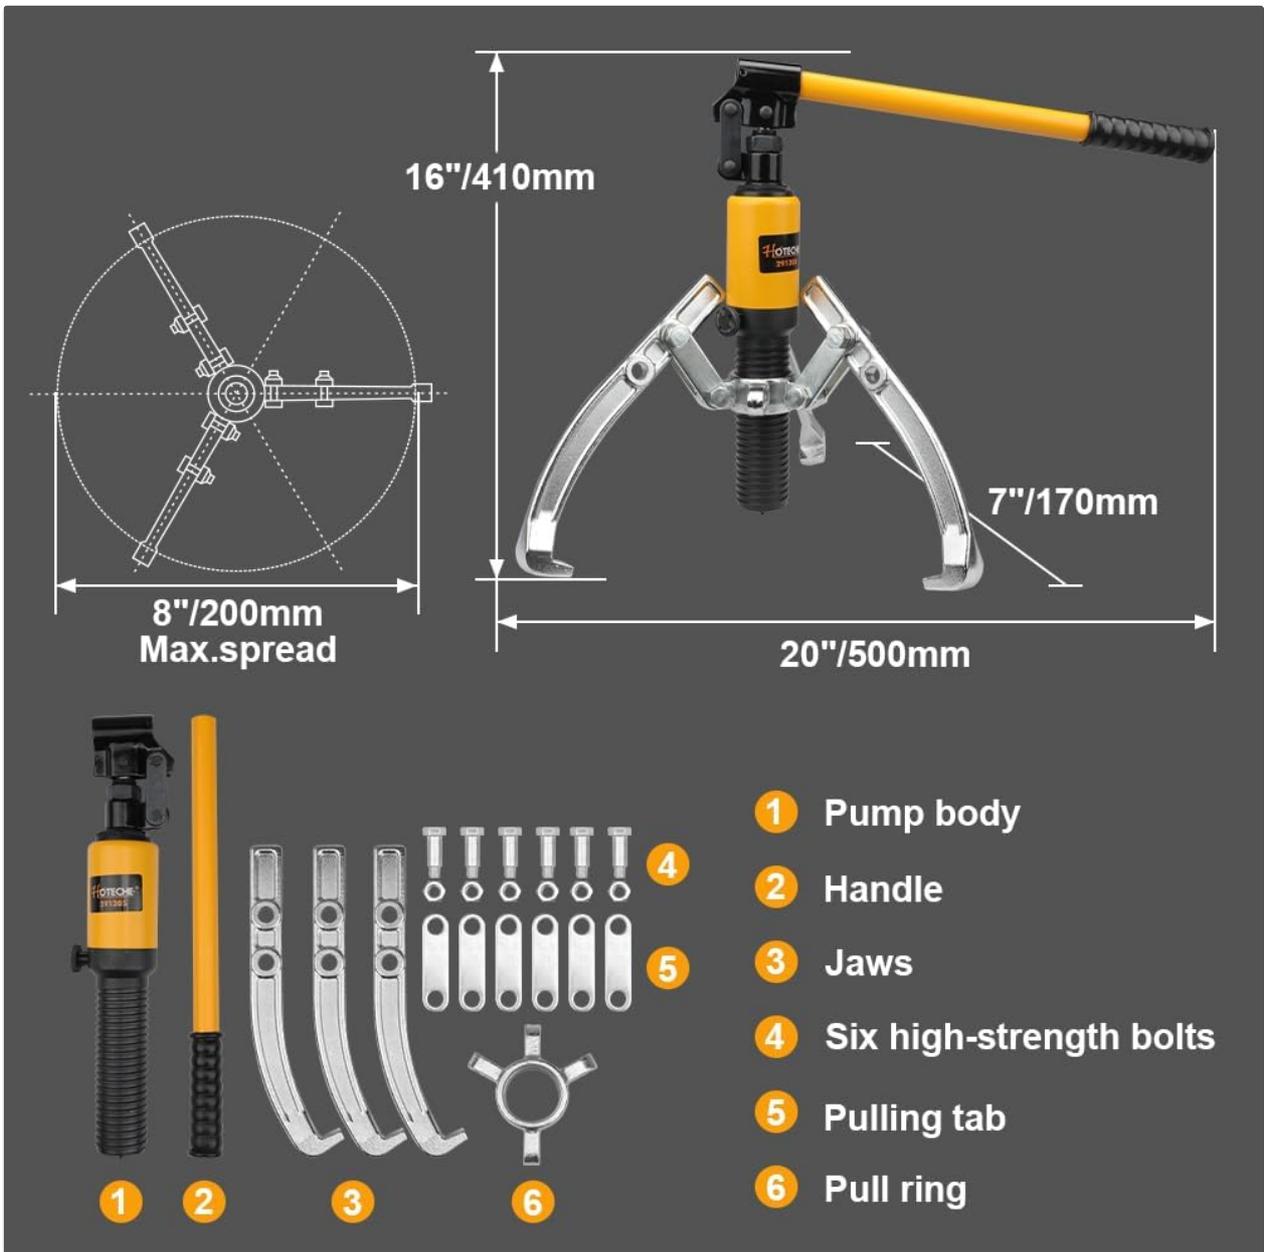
Diagram illustrating the dimensions and labeled components of the Hoteche 5-Ton Hydraulic Bearing Puller.
